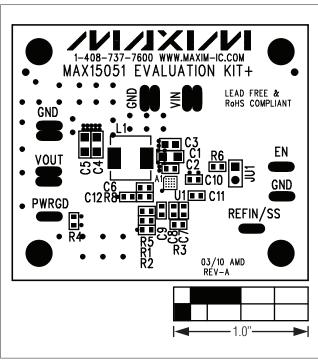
MAX15051 EV Kit Component Placement Guide— Component Side
